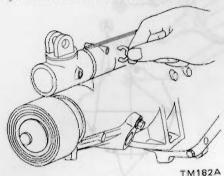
Removing Striking Rod E-ring and Stopper Pin
